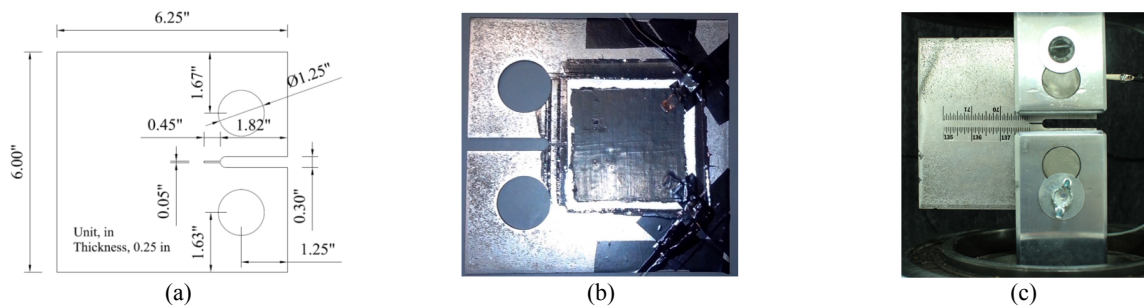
(a) Sizes of the specimen; (b) Sensor arrangement; and (c) adhesive tape measures
